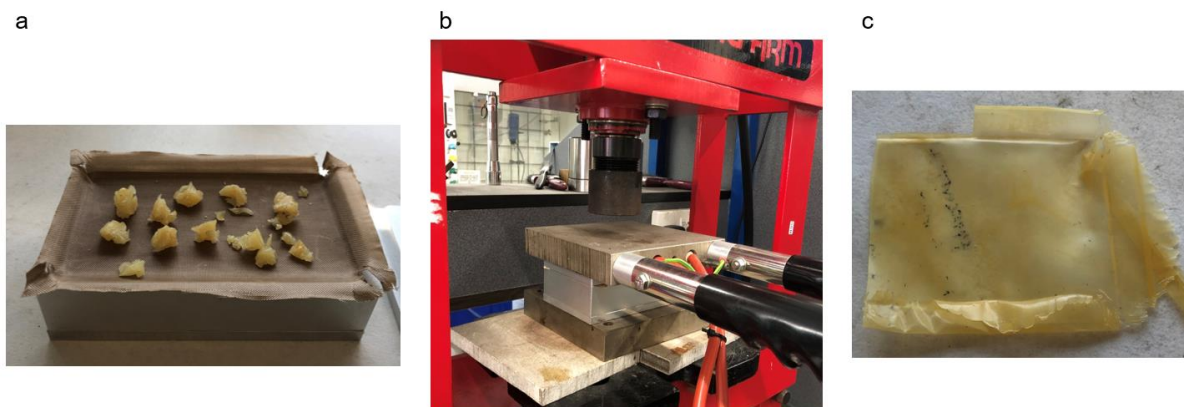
The compression moulding process. a) The material is spaced evenly in the mould and then b) the mould is placed between two heating blocks to produce c) a uniform sheet.
